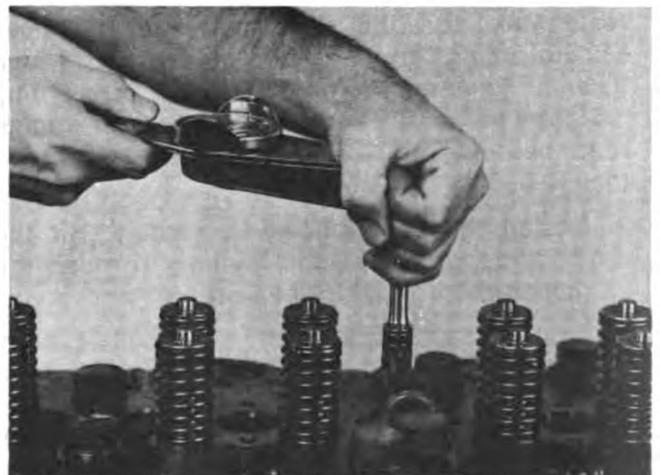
(N114258). Tighten The Screws For The Fuel Crossover.
